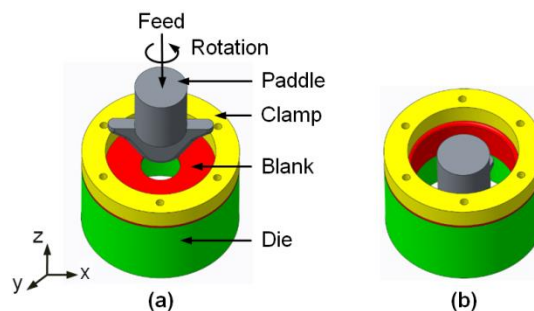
Setup of the hole flanging process by paddle forming. (a) Start of the process. (b) End of the process
